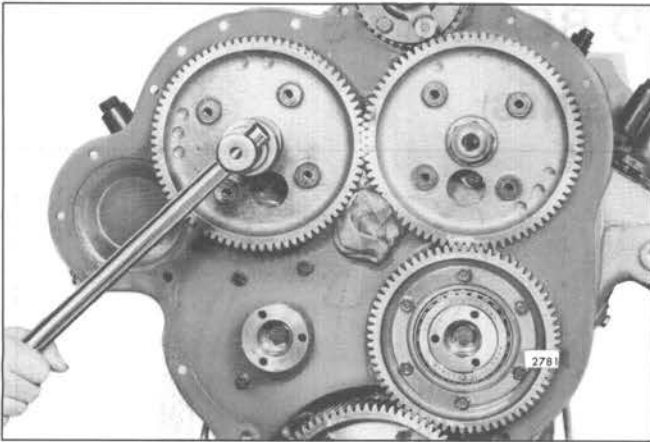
Loosening Camshaft Gear Retaining Nut
